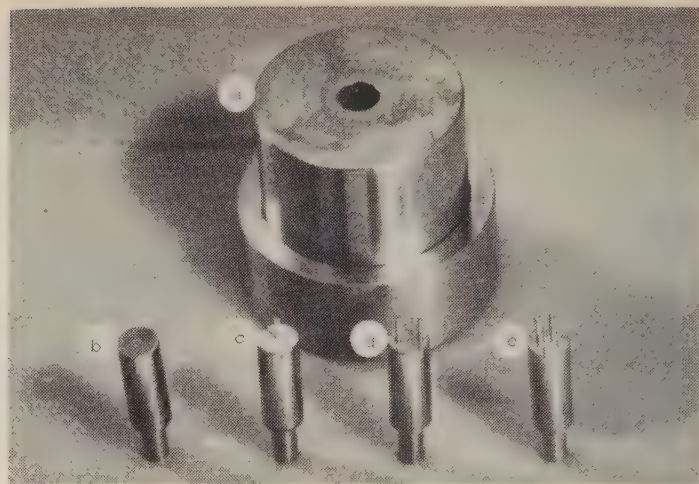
Compressive strength specimen assembly. (a) assembled mould, (b) control plunger (no pins), (c) one pin plunger with plated pin, (d) two pin plunger with serrated stainless steel pins, (e) four pin plunger with smooth stainless steel pins.
